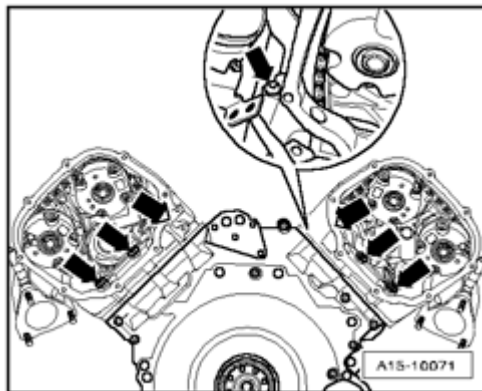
Removing Bolts At Rear Of Cylinder Head
